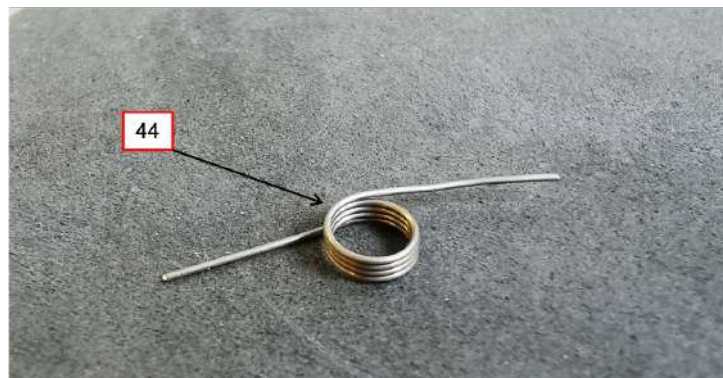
Labeled close-up view of the torsion springs used in the hand TD.
